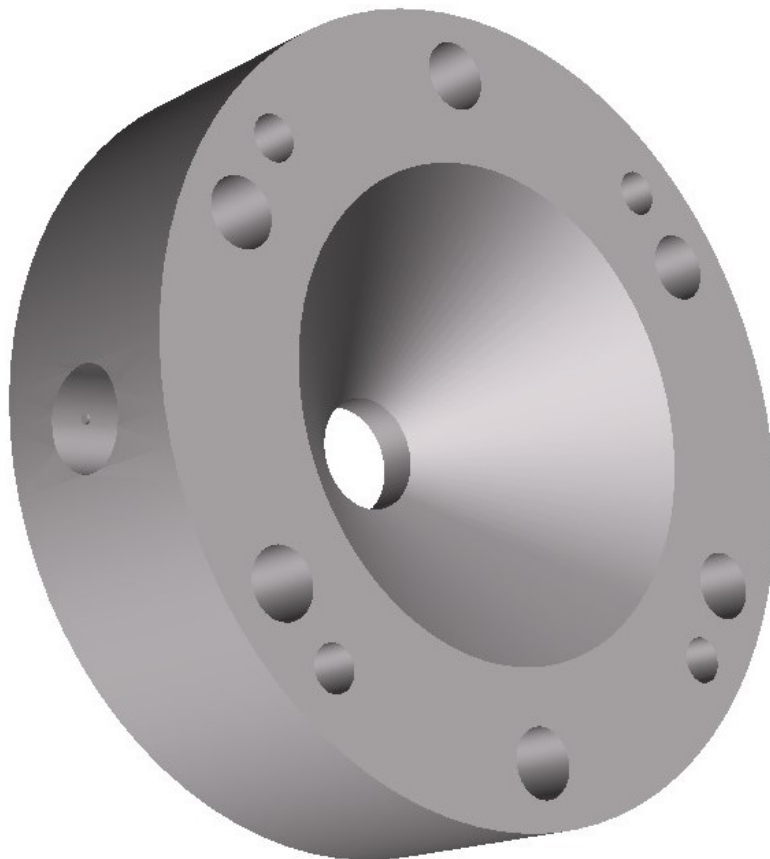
3D image of the LN₂ cooled sample holder, front view. The hole is 1 cm wide, while the outer diameter is 7 cm. The external flat ring, 1 cm wide, is bulk copper and hosts the alignment rods (in the 4 smaller holes) and the screws (6 larger holes).
